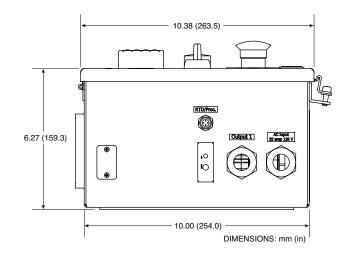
CNi-CB120 & CNi-CB240 Mounting Dimensions (Bottom View)
